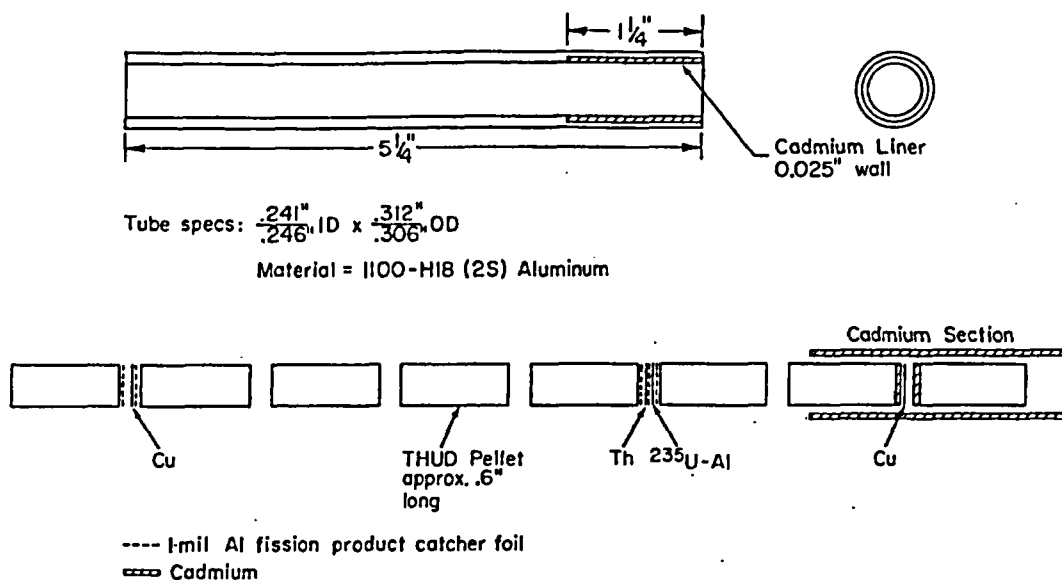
THUD I REMOVABLE FOIL LOADING ROD
